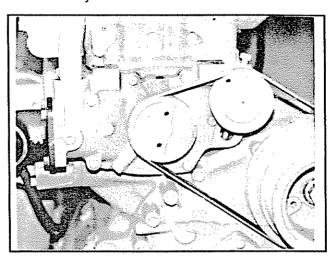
GTA855 BCIII Water Pump Drive Belt
